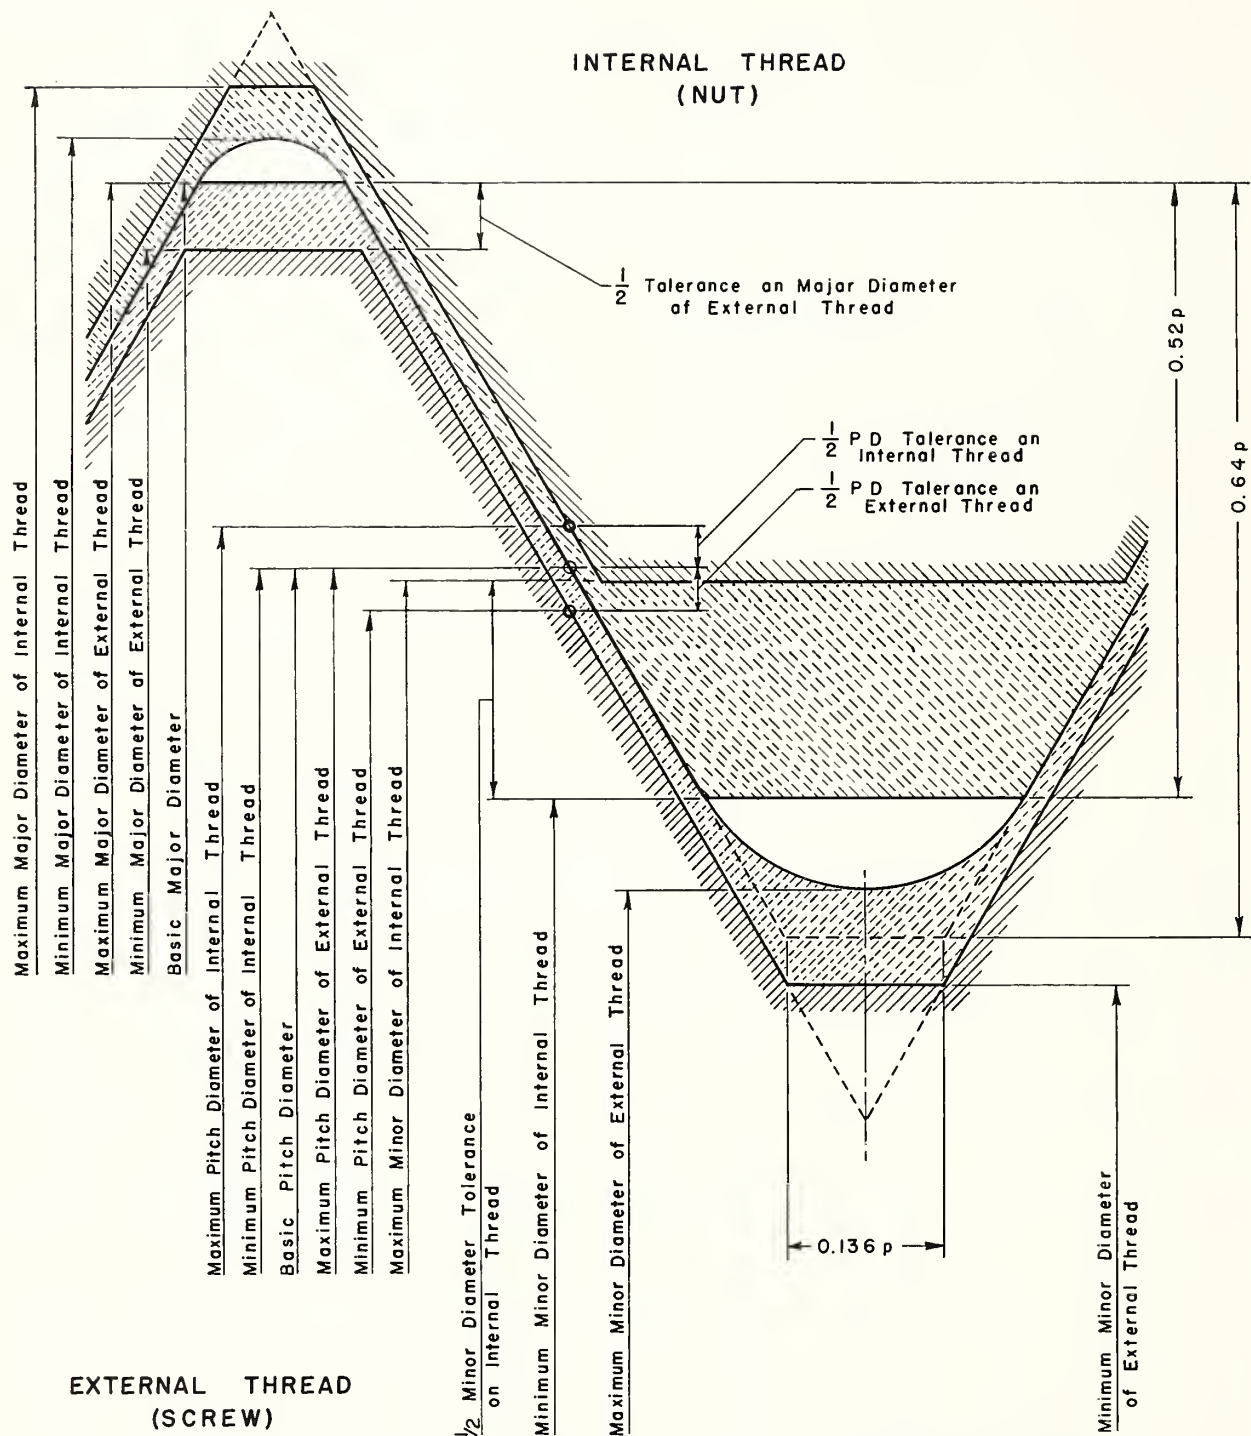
Disposition of tolerances and crest clearances, National Miniature threads.
